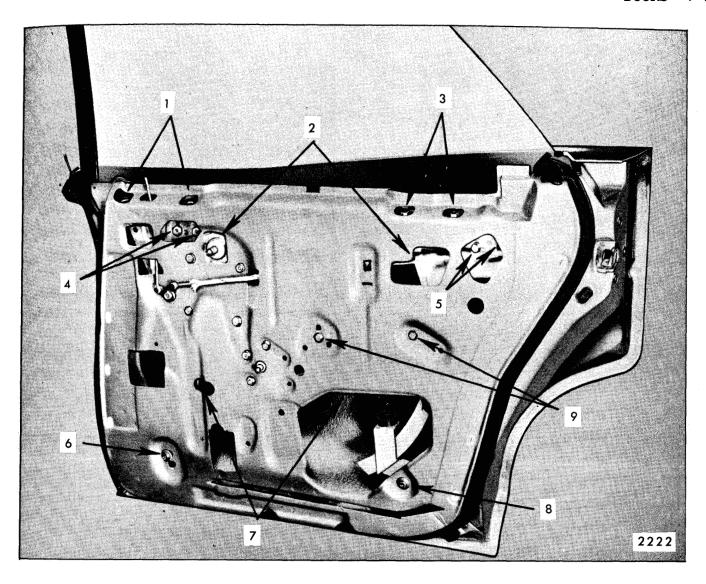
Rear Door Hardware Attachment "B-C 39 and C-69" Except 68069-68169 Styles
